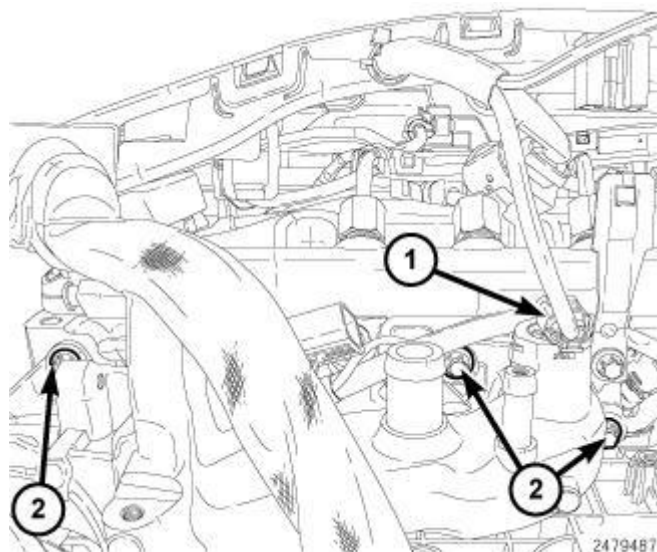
ECT Sensor Connector & Thermostat Housing Bolts
